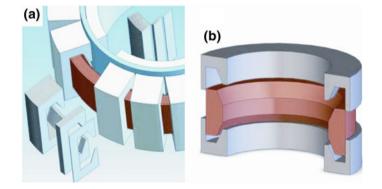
Parts used in the tubular linear synchronous motor for magnetic circuits: made of electrical steels (a) and made of soft magnetic composites (b) [34]
